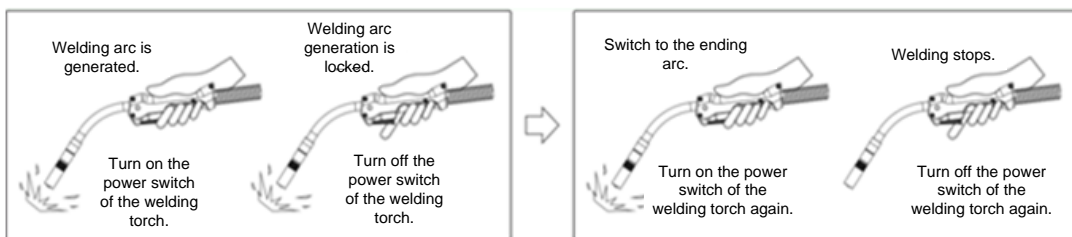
Schematic diagram of welding with ending arc
